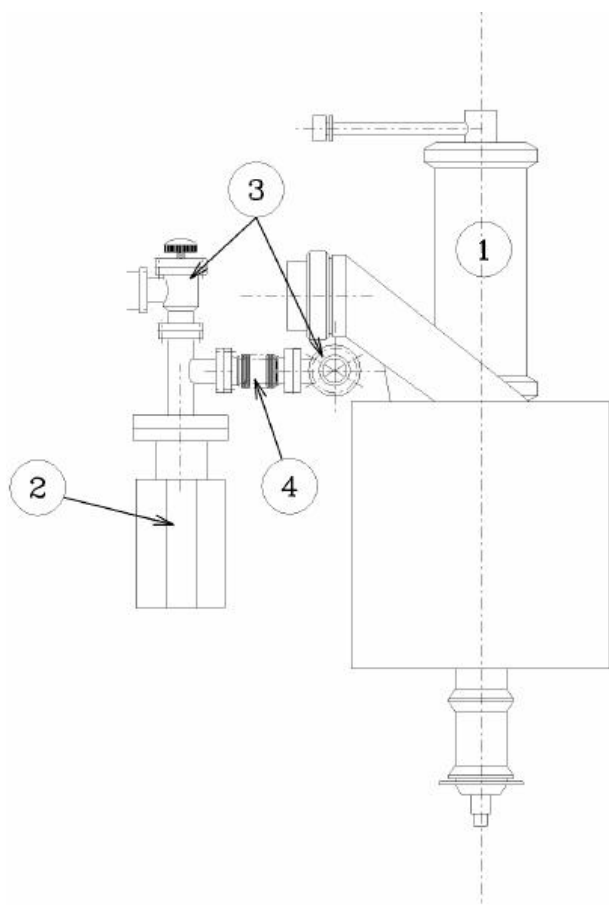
side view of the tube with the auxiliary pumping system. 1 – TH2075 Klystron; 2 – Ion pump (30 l/s); 3 – Right-angle valves; 4 – Bellows.
